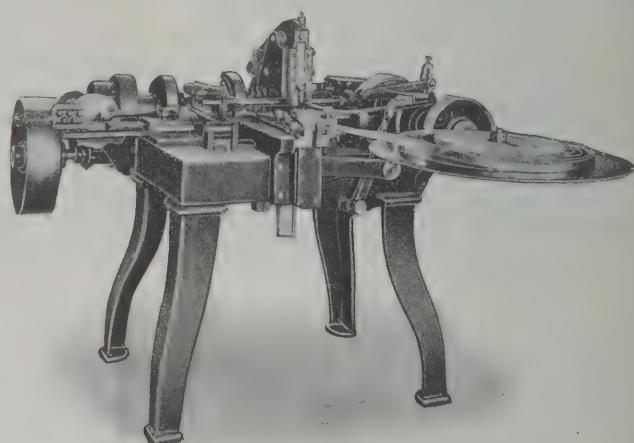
Automatic Machine for Wire Bending and Ferruling
